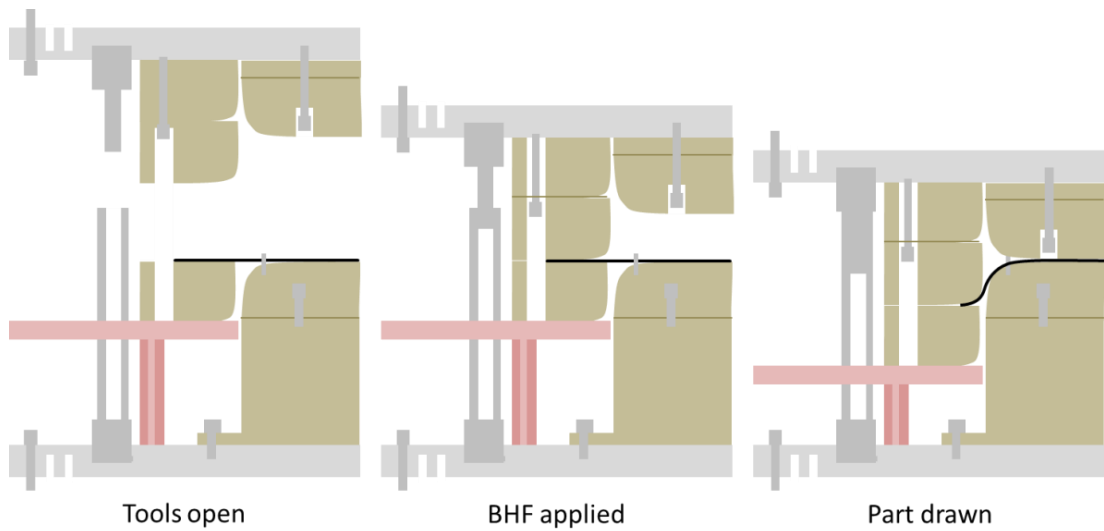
Illustration of tool set up for drawing with a blank holder.
